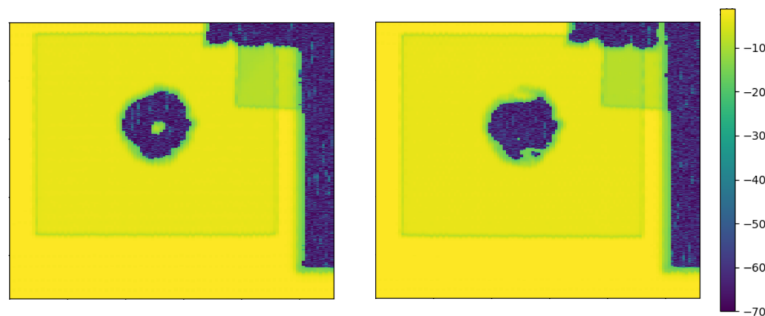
C-scan of specimen AMP-600N-16sec. Left: before welding. Right: after welding.
